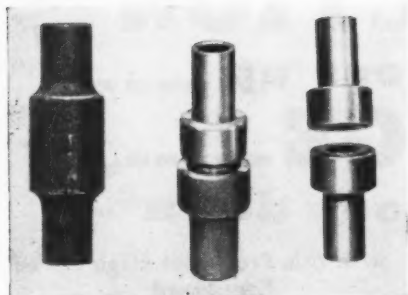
Three steps in the machining of gear blanks on a converted bar machine. At left the rough casting; next, the first operation; last, second operation.
